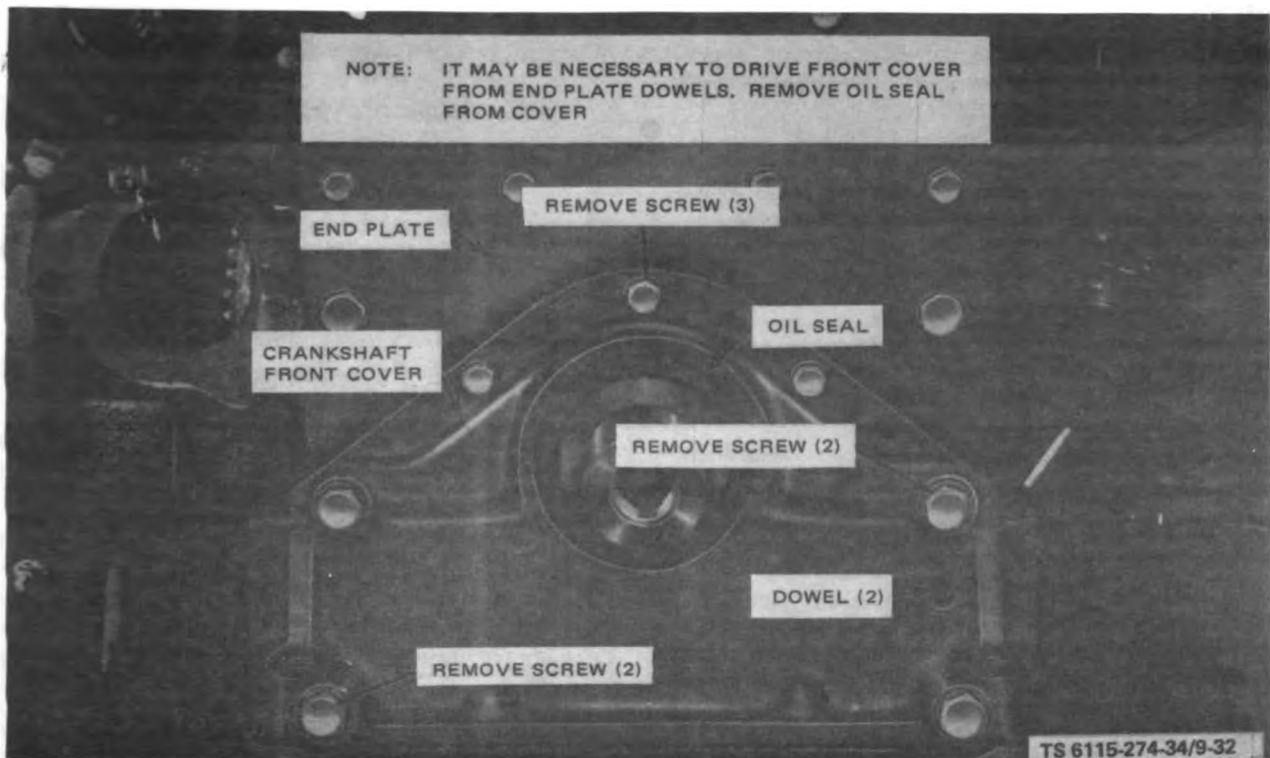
Crankshaft Front Cover, Removal and Installation
